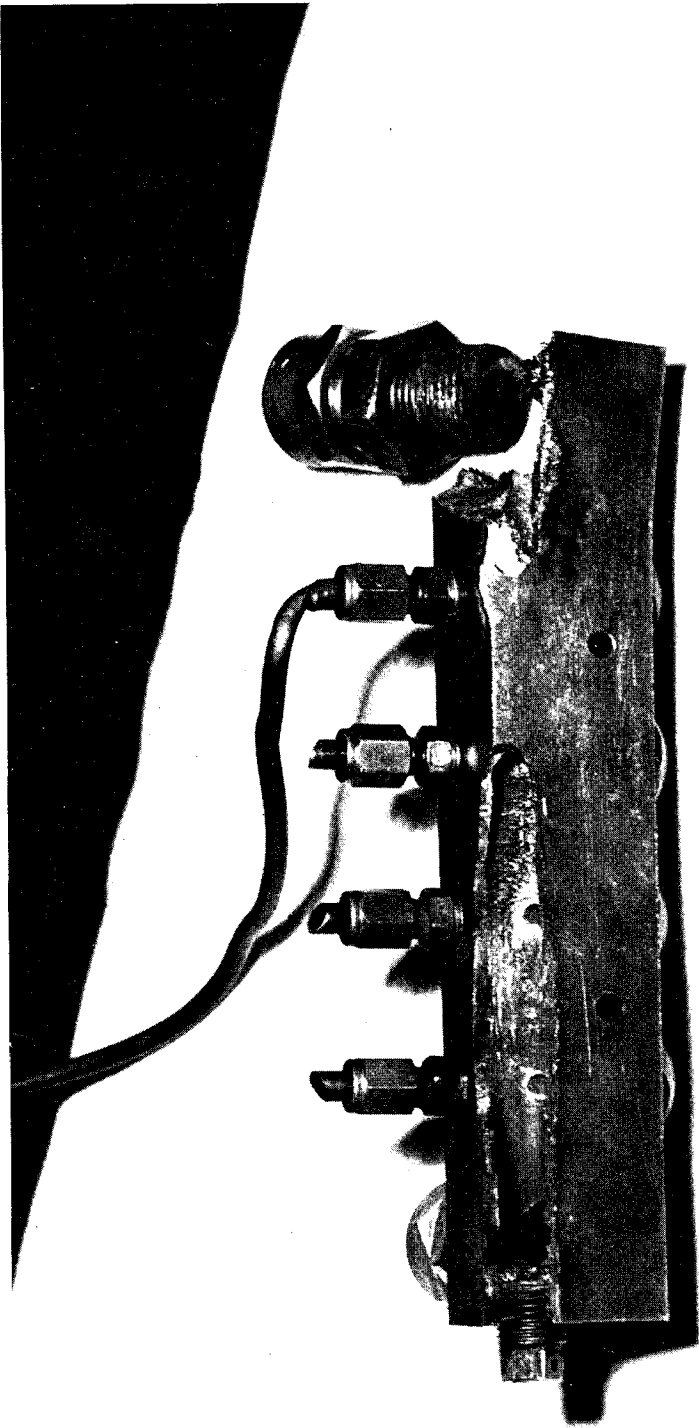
DAMAGE TO MANIFOLD SHIELD
